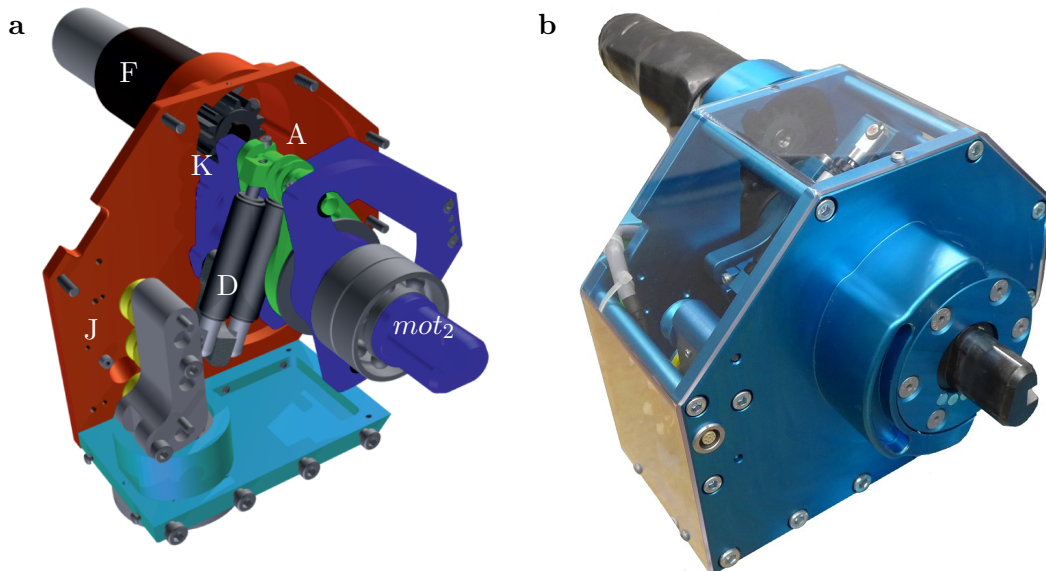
Passive gravity compensation with a toggling mechanism for changing the direction of the compensation torque. (a) Technical design of the mechanism with the spring attachment point (A), dampers (D), motor with gear (F), deflection pulleys (J) and the custom gear (K); (b) Finished hardware.
